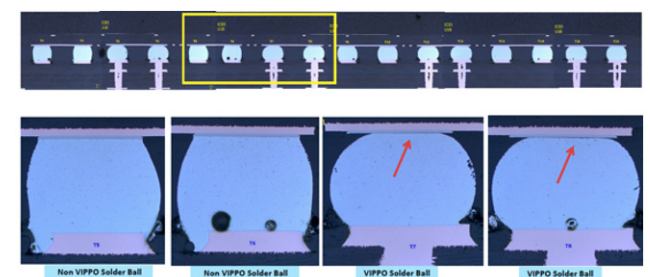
DDR4 TV Assembly Results with Solder Joint Encapsulant Material A
